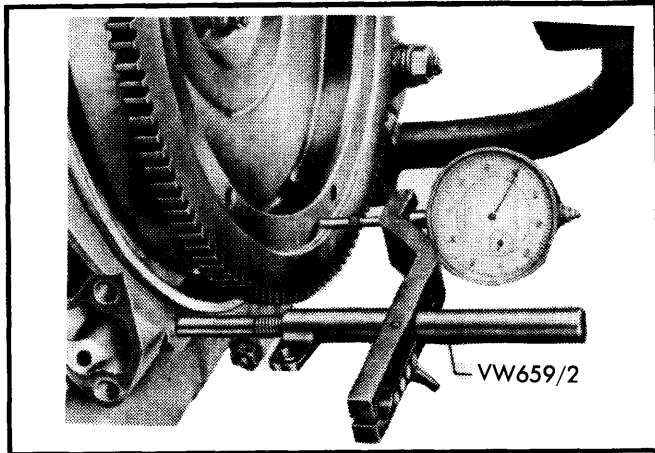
Checking Crankshaft End Play with Dial Gauge
